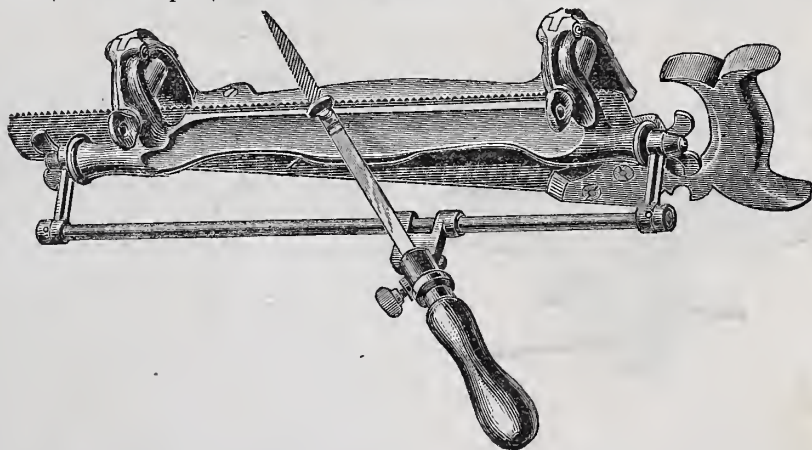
Elkin's Saw Sharpener, Manufactured by Aborn, Haskell & Co., Boston, Mass.
